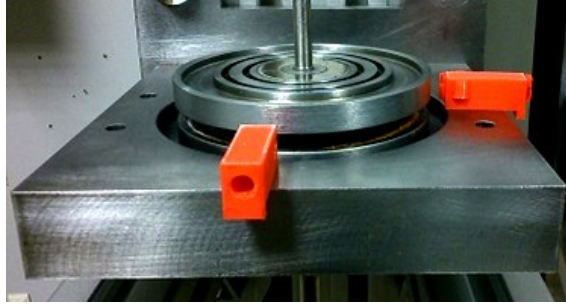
Disc and bottom part of the Hybrid Axial Magnetic Bearing.
